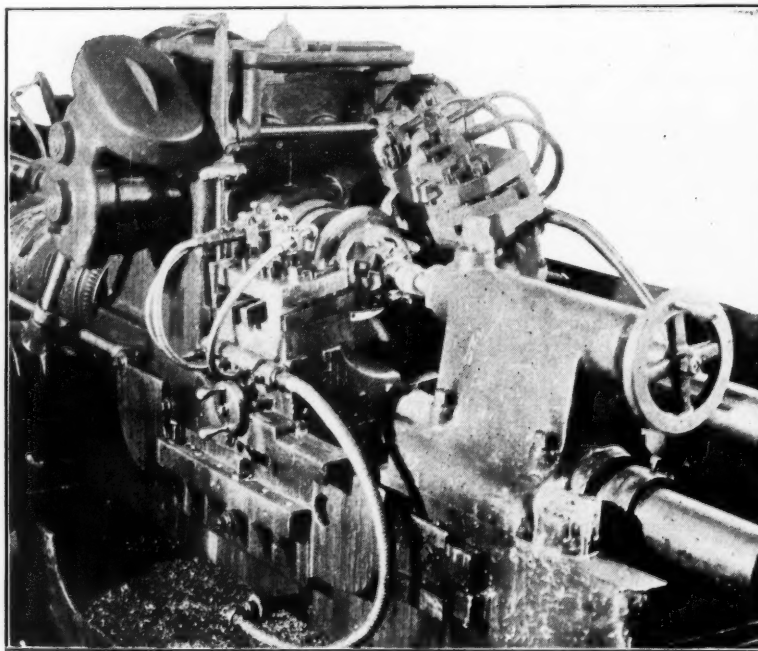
Fay automatic lathes rough and finish all outside dimensions on differential carriers to close limits so that no grinding operation is required
